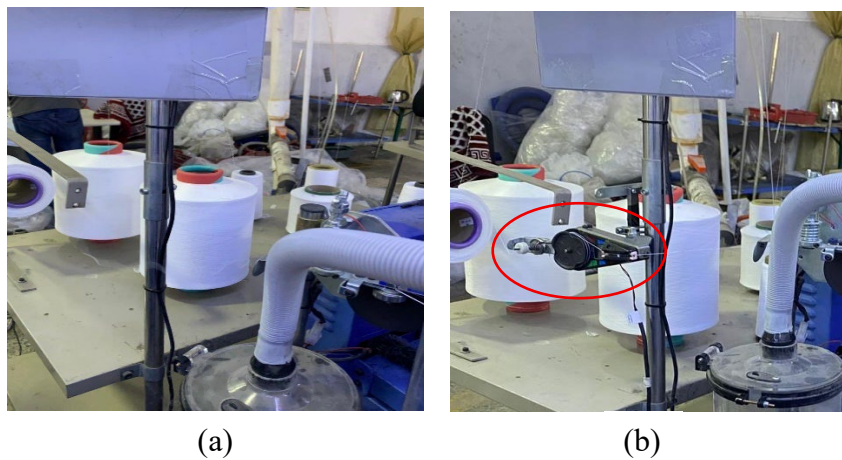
Knitting Machine 35 (a) Before, (b) After Attaching the Keep Tension Yarn Feeder.
